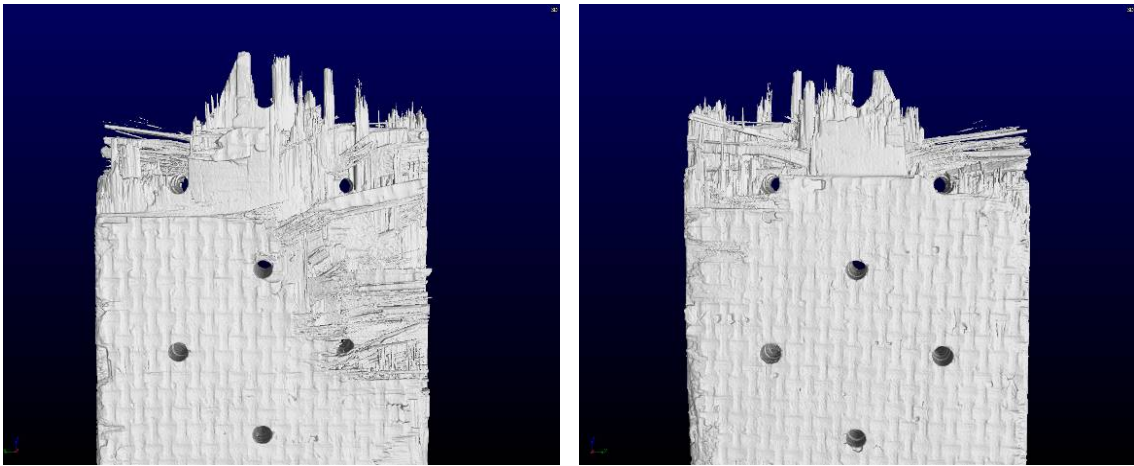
3D image of the top fracture surface of specimen #3, tested in tension to failure at 1200°C in air
